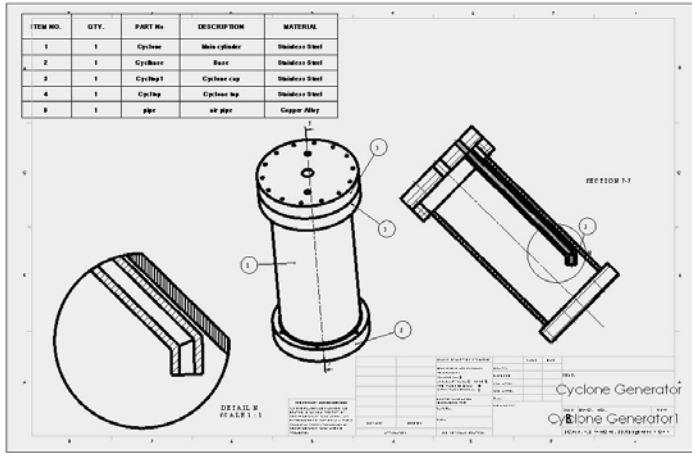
a. Seeding generator drawing with 45<sup>0</sup> bent air purging pipe.
